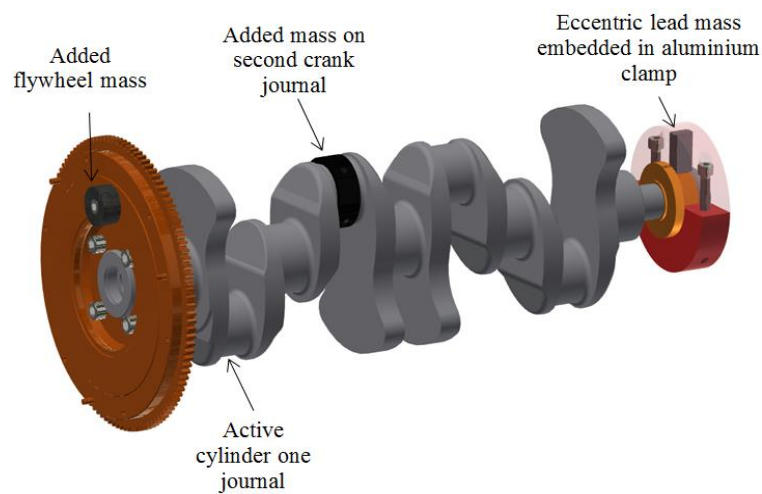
Crankshaft assembled with flywheel and counterweight masses used to rebalance the cranktrain.
